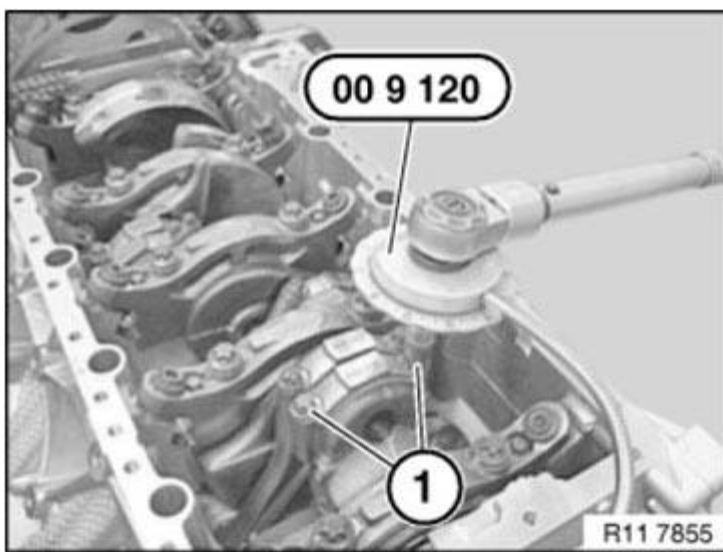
Tightening Down Connecting Rod Bolts With Special Tool 00 9 120
